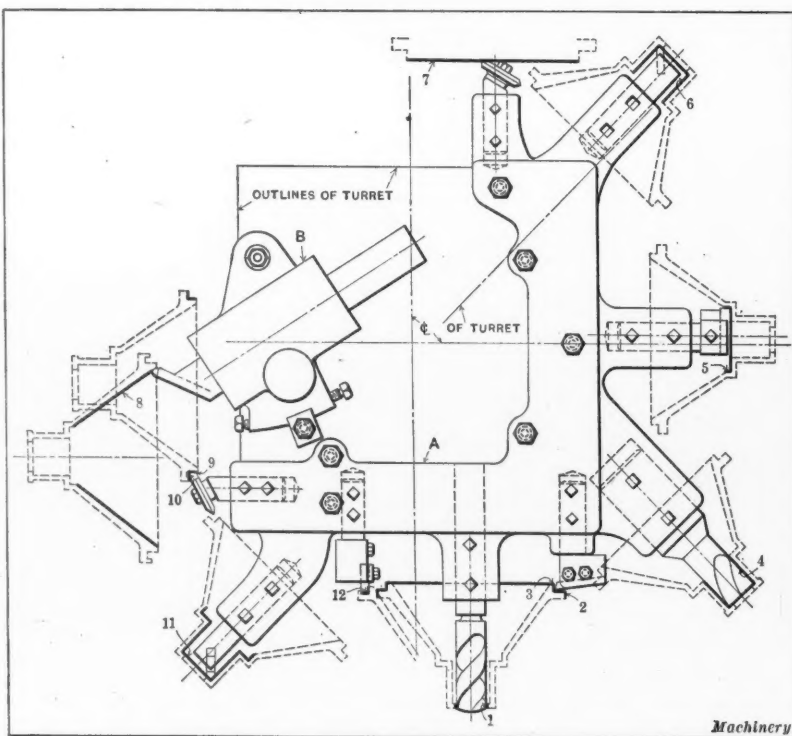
Tooling Lay-out, showing Tools employed to machine the Interior Surfaces of Cream Separator Bowls
